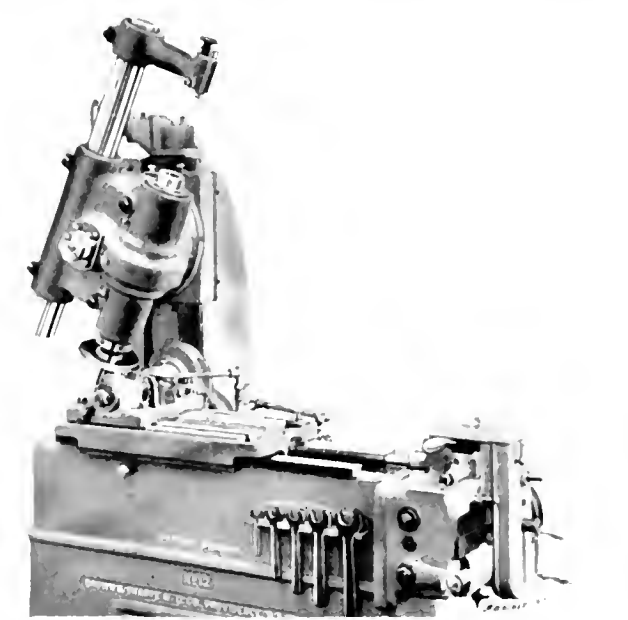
Cutting Bevel Gear with Inside Hub by using Outer End of Work Spindle
